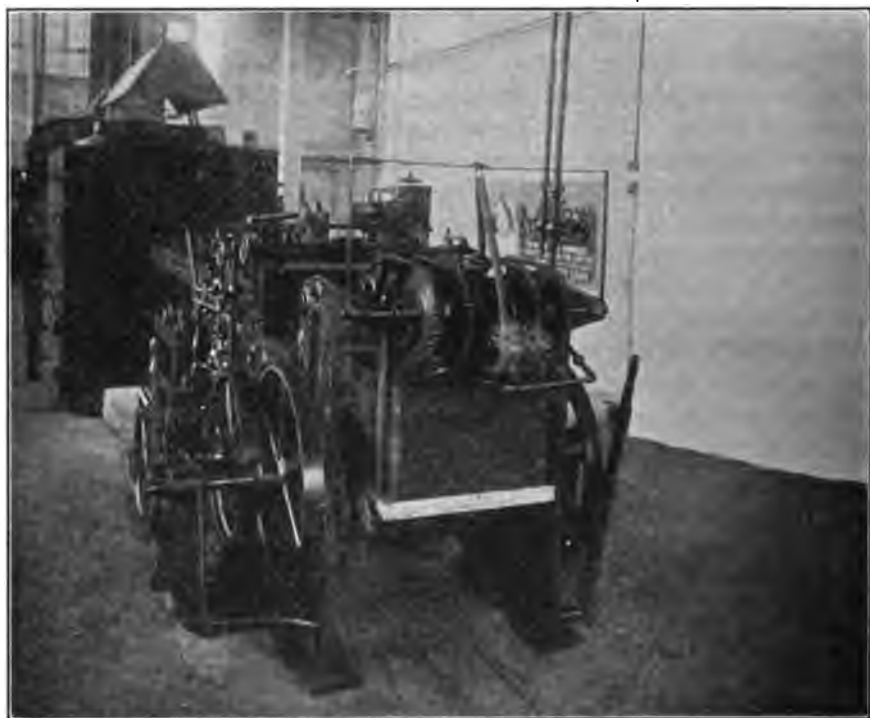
THE SHEET-FEEDING MACHINE AND COATING ROLLS.
